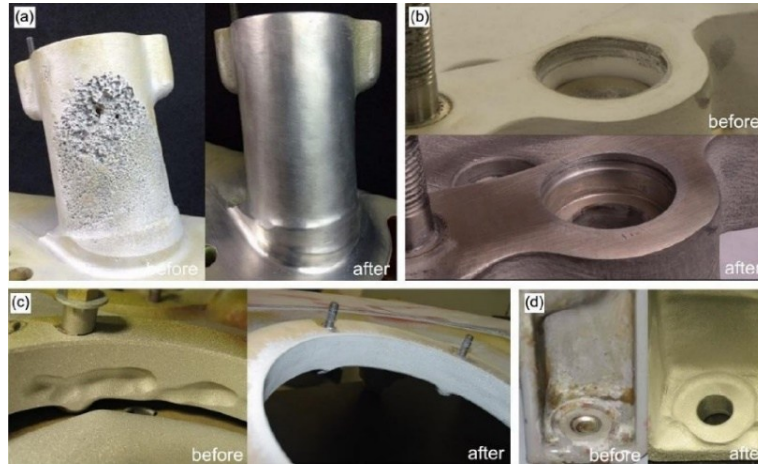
Comparison between damaged and CSR components: (a) S-92 helicopter gearbox sump, (b) oil tube bores in CH47 helicopter accessory cover, (c) UH-60 helicopter gearbox sump, and (d) UH-60 rotor transmission housing [76] [81].
